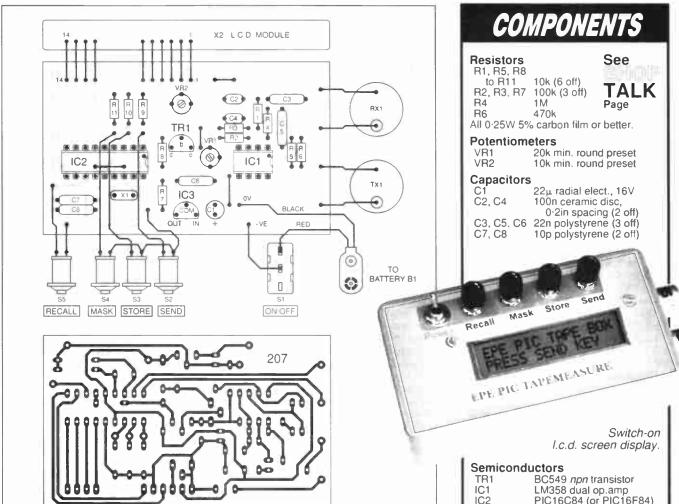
PIC Tape Measure printed circuit board topside component layout, interwiring and full size copper foil master pattern.
